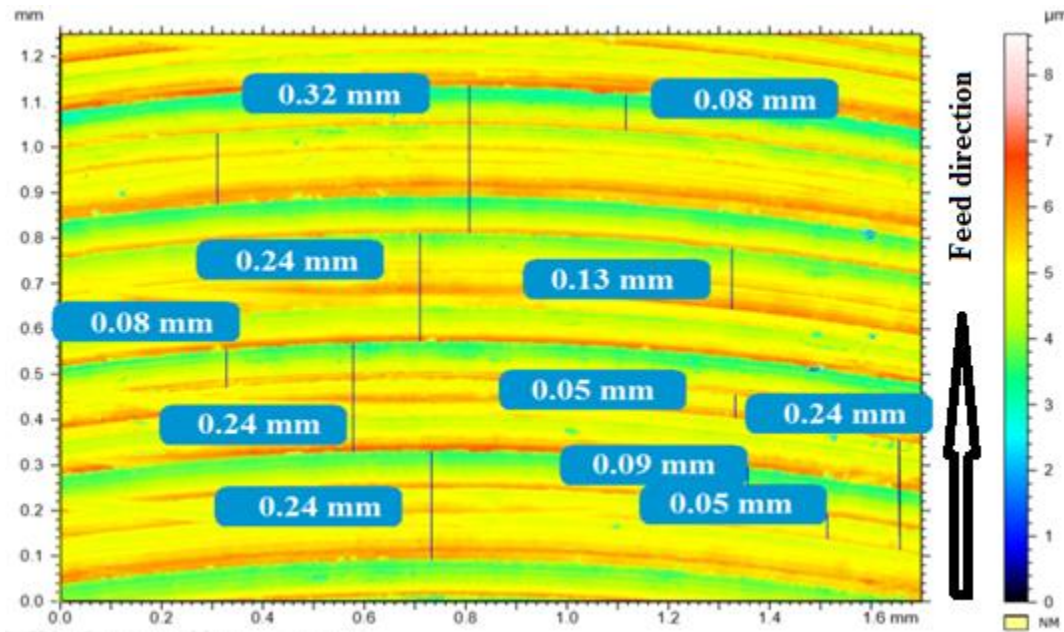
Distribution of cutting marks over the material surface after the end-milling process of DIN 1.1730 material. (Sample #5 – North cutting direction, 0,04 mm/tooth)
